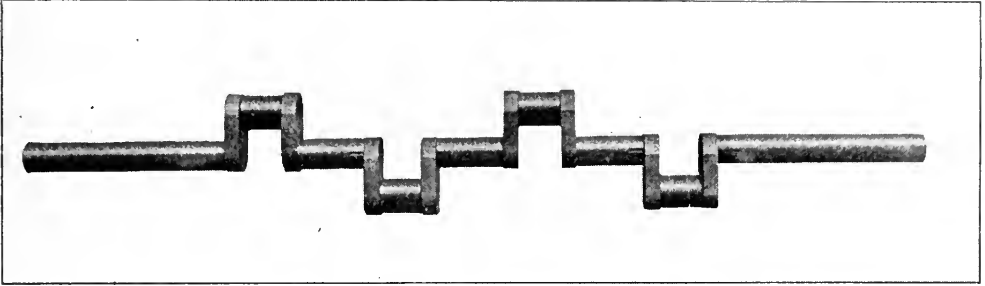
Four-throw Crank Shaft for 100-horse power Gas Engine, manufactured by the J. I. Case Threshing Machine Company, of Racine, Wis. Diameter of shaft, $4\frac{1}{4}$ in.; diameter of pins, 5 in.; total length, 10 ft. $6\frac{5}{8}$ in.; weight, 775 pounds.
